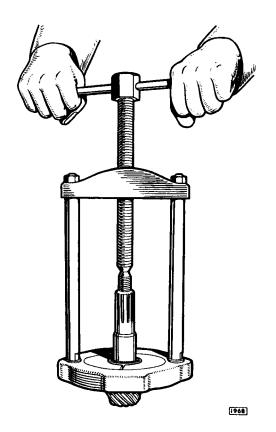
Withdrawing the pinion inner bearing using Churchill Tool No SL 14 with adaptor No. SL 14-3
